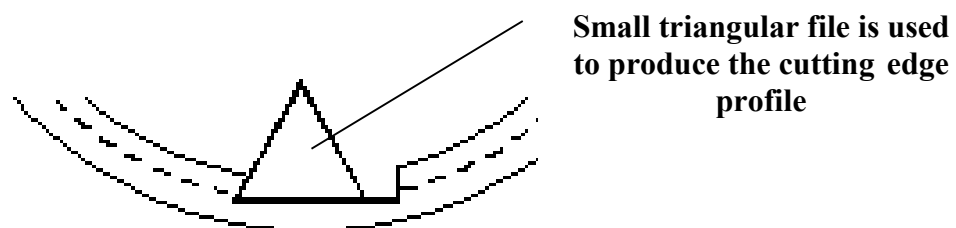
The GI Tee with detail of the cutting edge profile on thread
